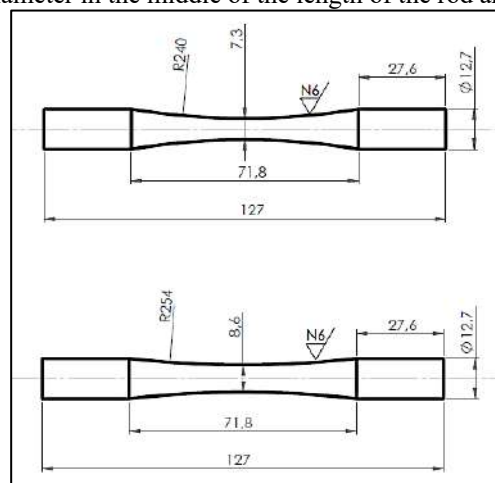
Shape and dimensions of standard fatigue test specimens with 2 kinds of radius on 254 mm and 240 mm
